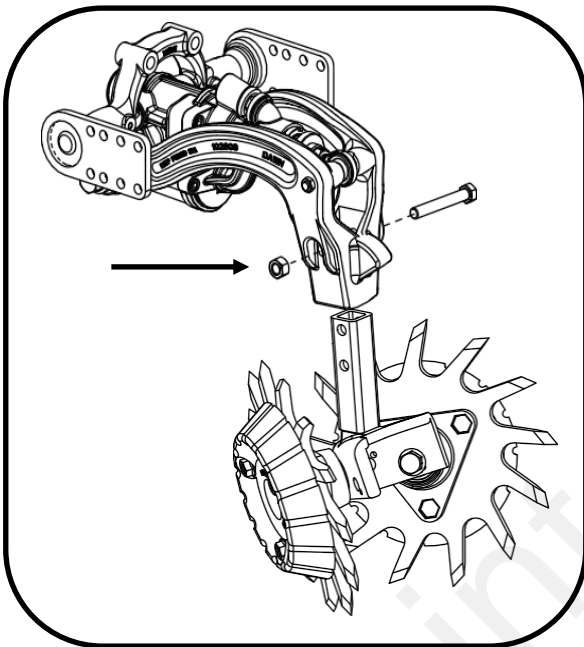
Due to forging die wear, you may need to insert a flat-head screw driver to secure nut when tightening.
